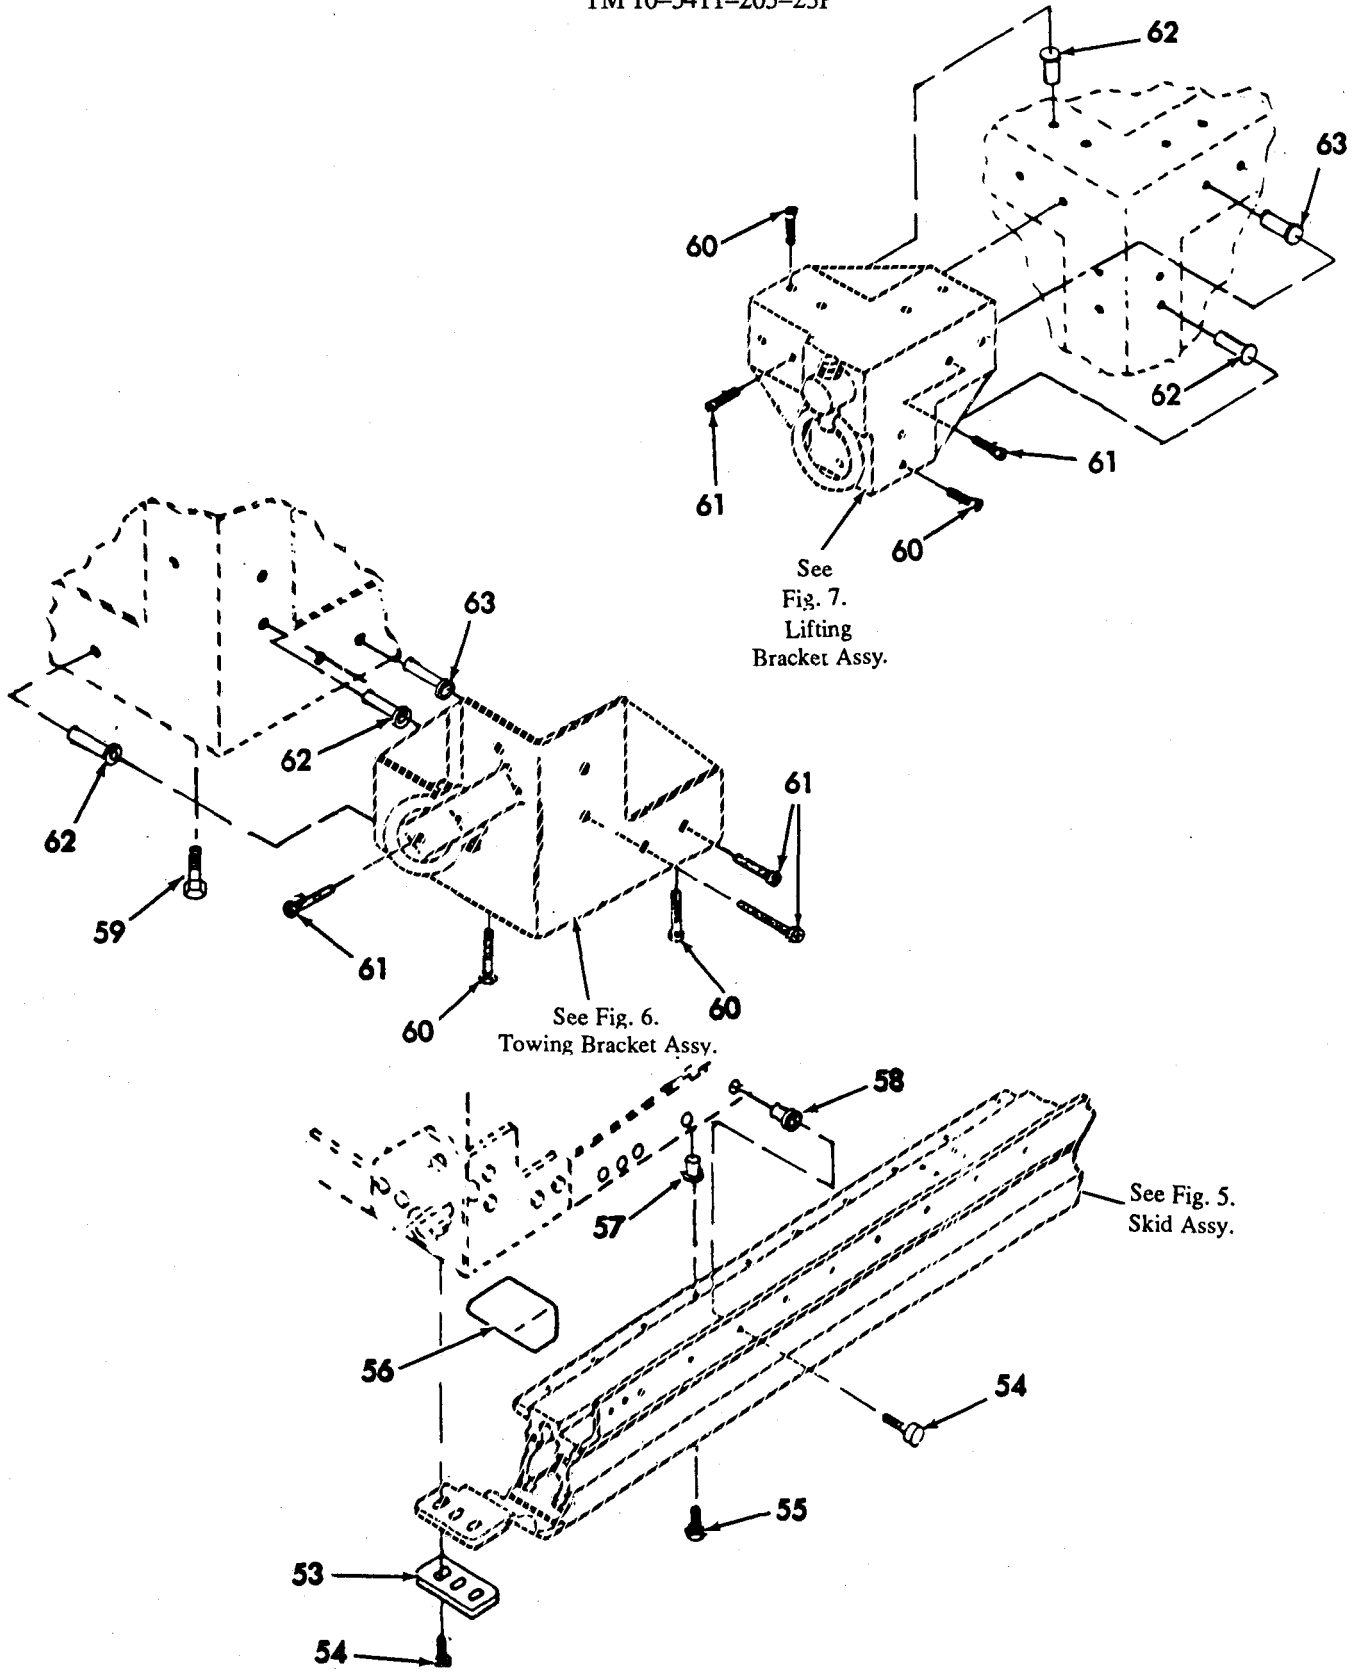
Shelter, Electrical Equipment S-250/G (Sheet 4 of 4)
